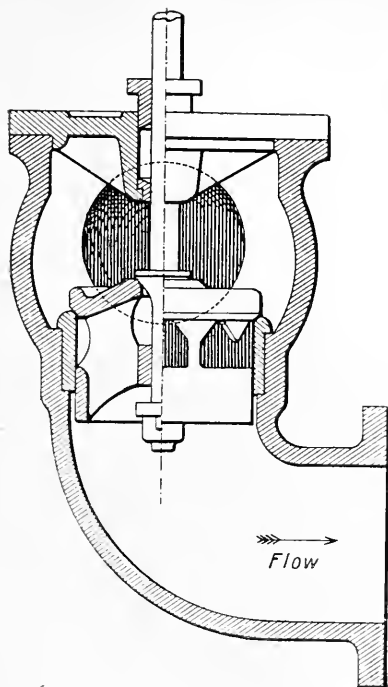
Engine Stop and Regulating Valve (for small engines).
